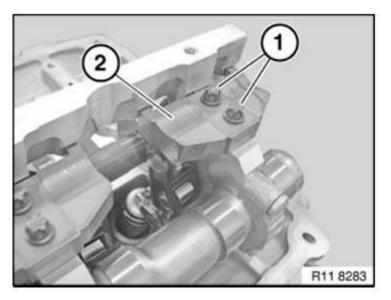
Identifying Guide Block With Mounting Screws Courtesy of BMW OF NORTH AMERICA, INC.
